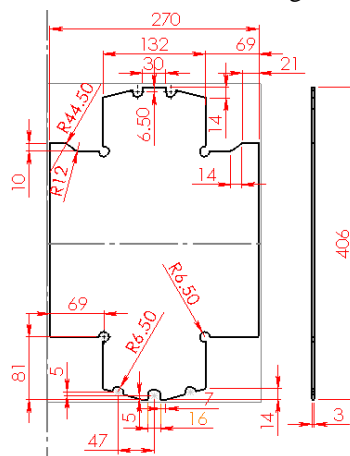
Features and dimension of explosive reactive armor holder before bending operation
